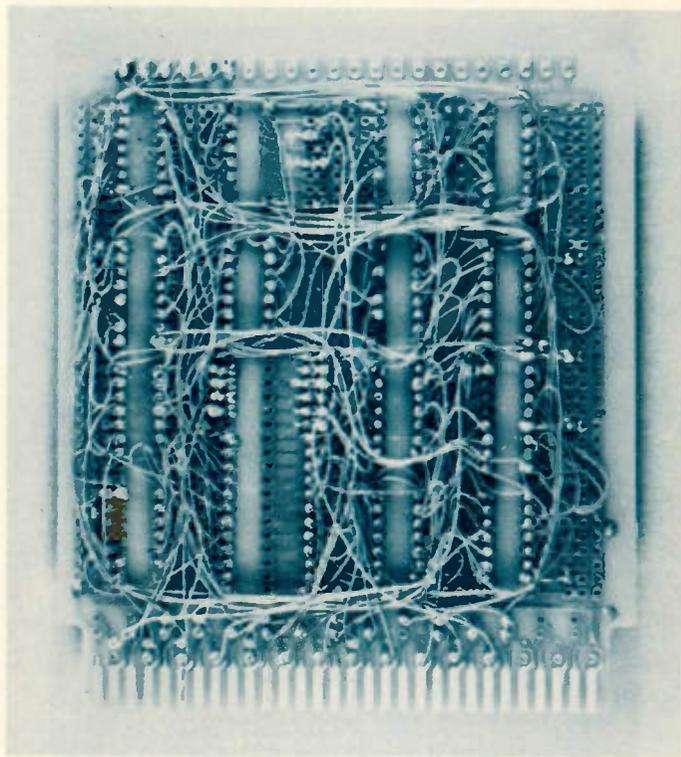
Photo B. Typical wire-wrapped circuit board. This board is of “universal type” with printed circuitry on opposite side.
